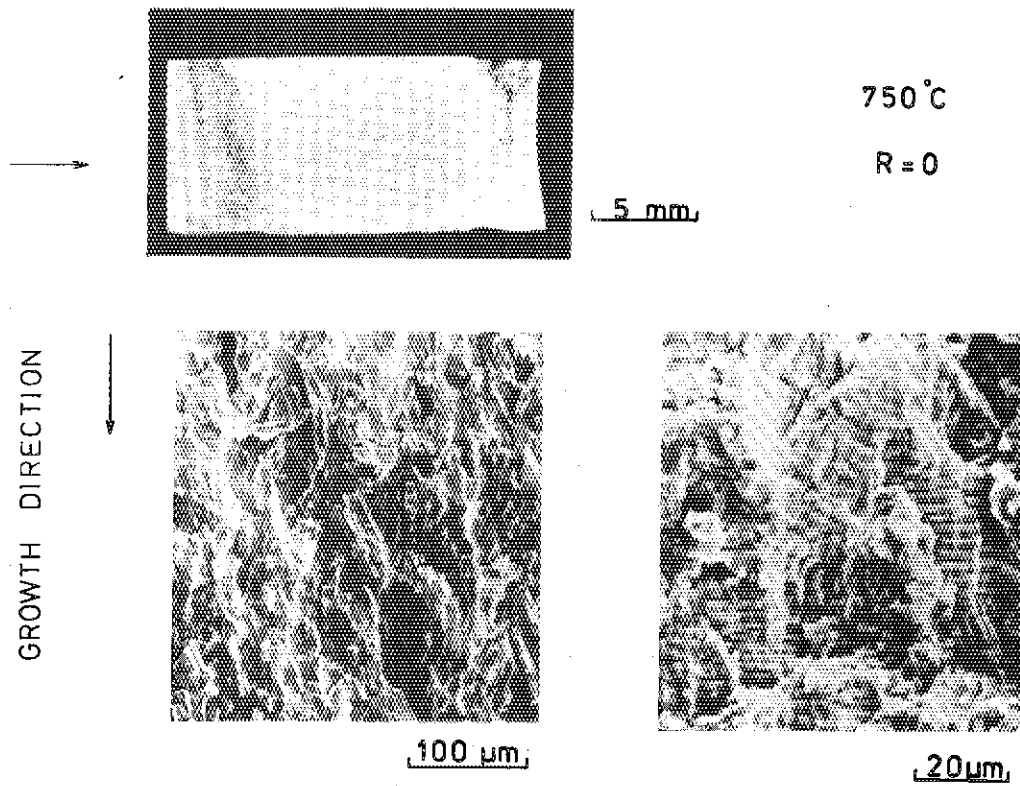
Appearances of fractured surface (S.E.N., 750°C, R=0)
